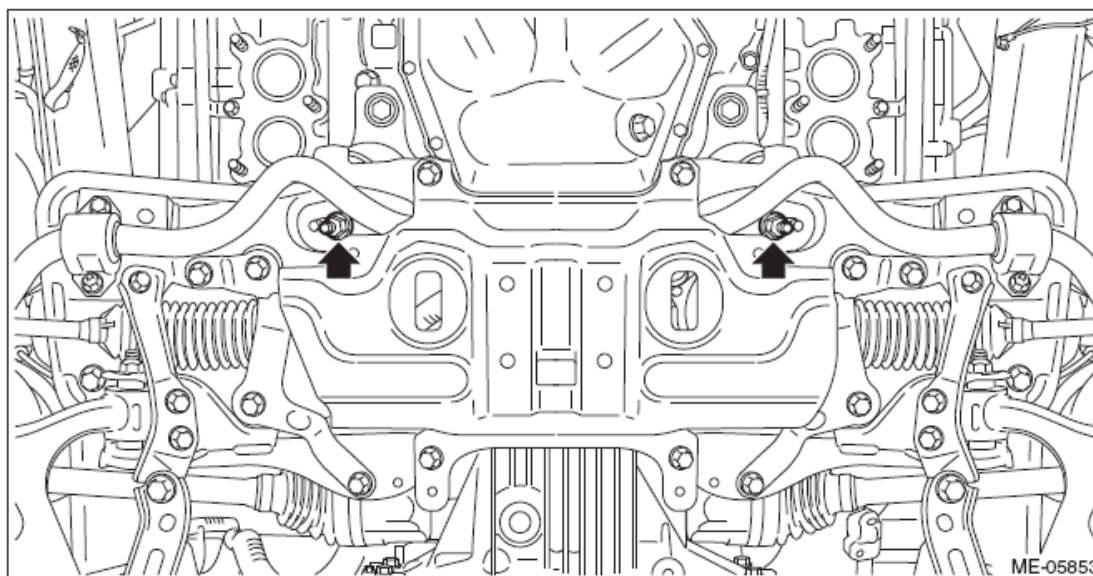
Locating Engine Mounting To Front Crossmember Nut
